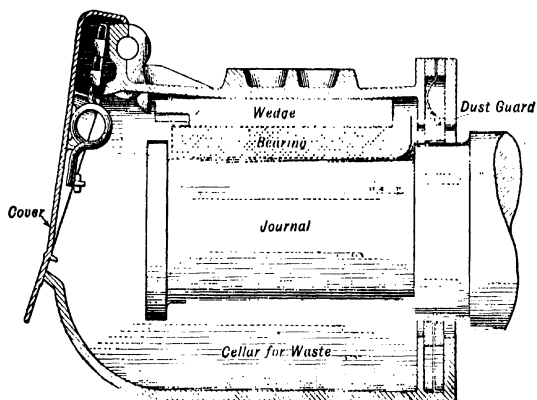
Journal Box for Locomotive, — Sectional View.
